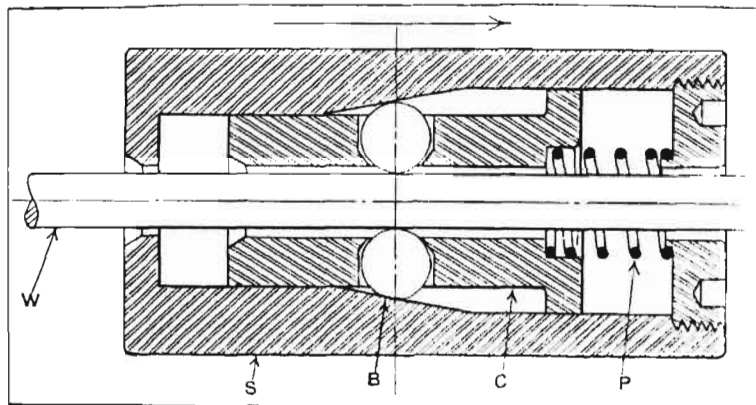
Simple Design of Wire-feeding Device of Friction-grip Type
